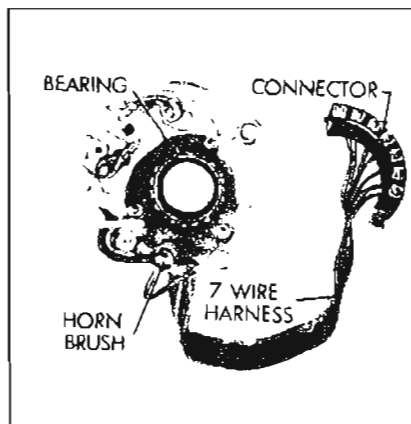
Turn Signal Switch Plate and Wiring Assembly
